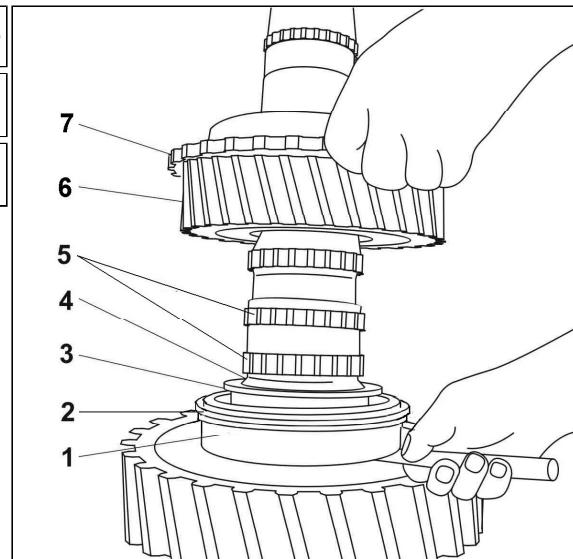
Assembly of the 3rd speed driven gear and bearing
